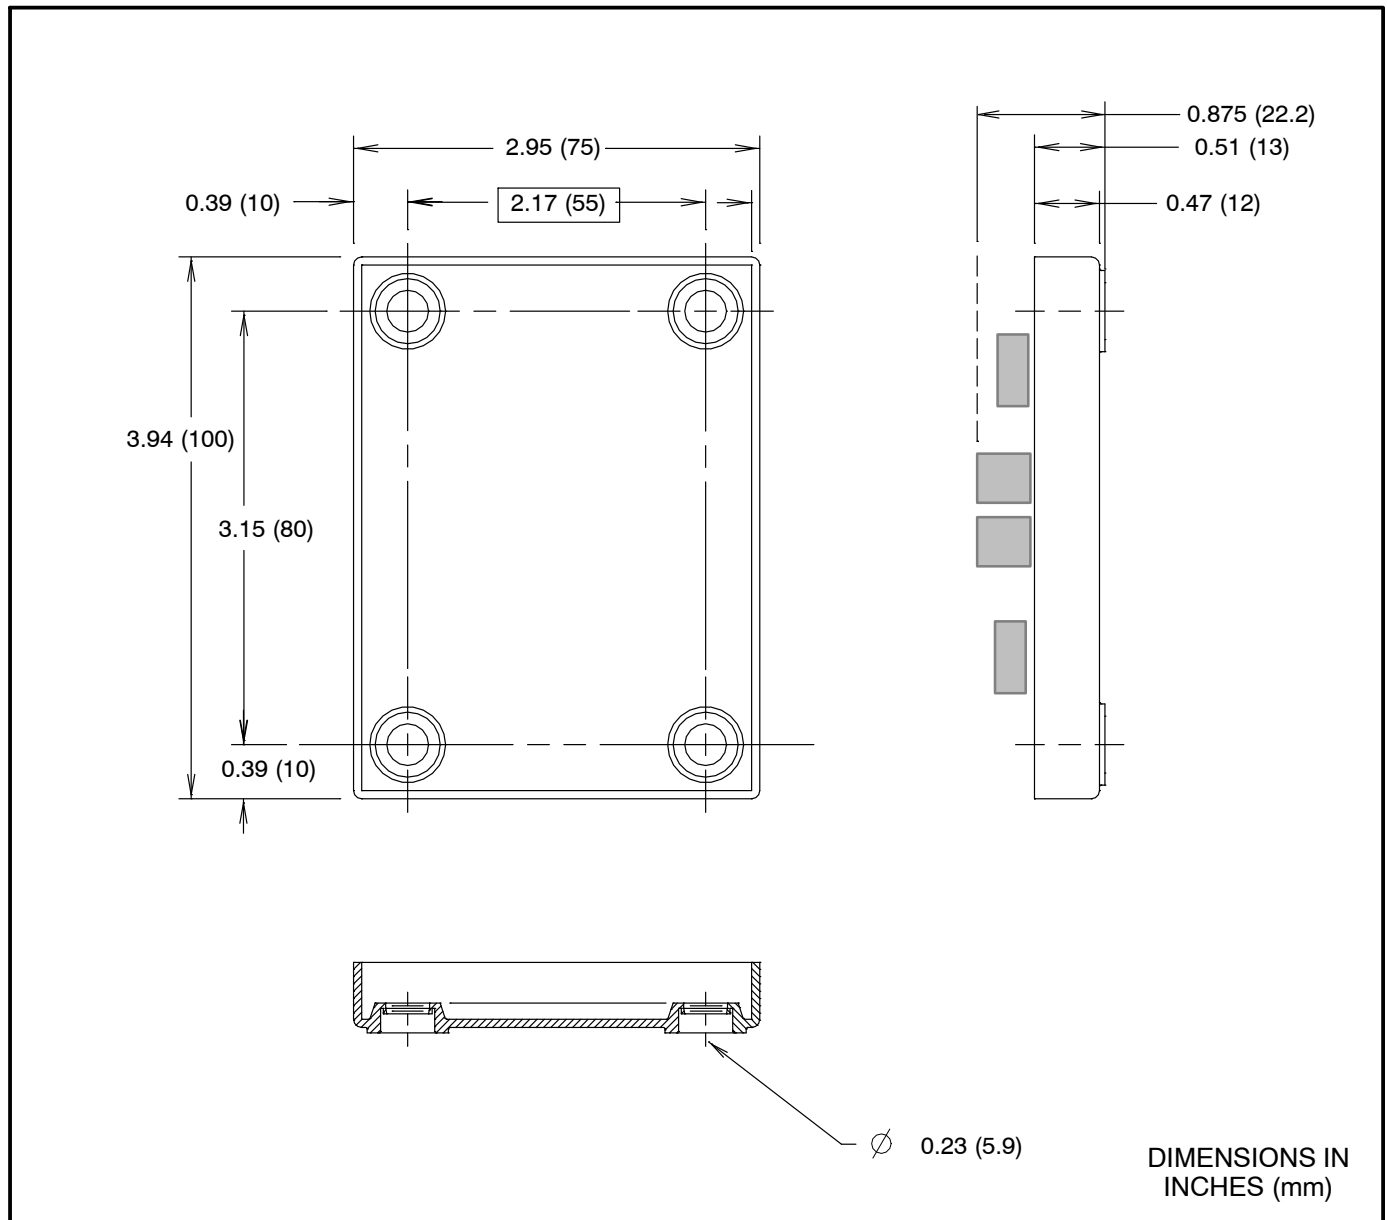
MOUNTING THE JUNCTION BOX / TERMINATOR MODULE OUTLINE DRAWING
